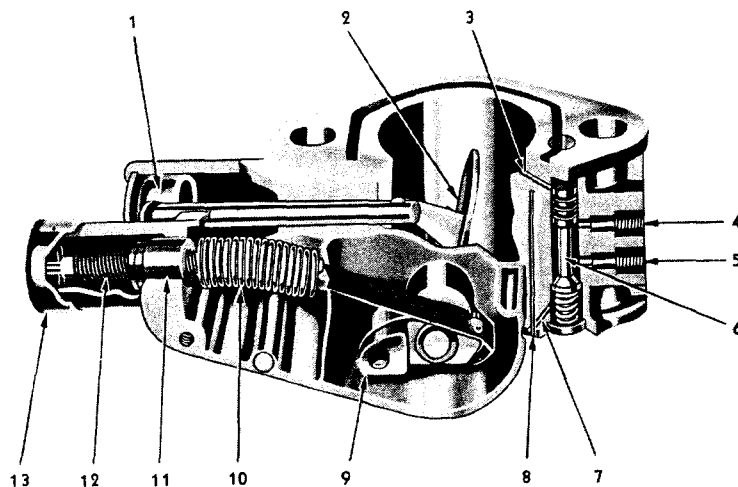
Hoof Mechanical Governor Lubrication Plugs and Bumper Spring Adjusting Screw
